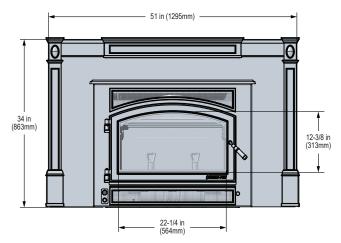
Front View with Large Flat Surround with Cast Trim (CT2-5134)
